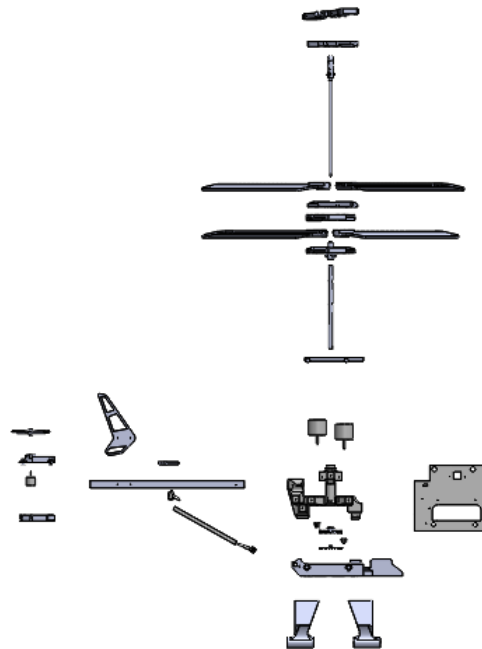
SolidWorks model of the up scaled U13A helicopter exploded
